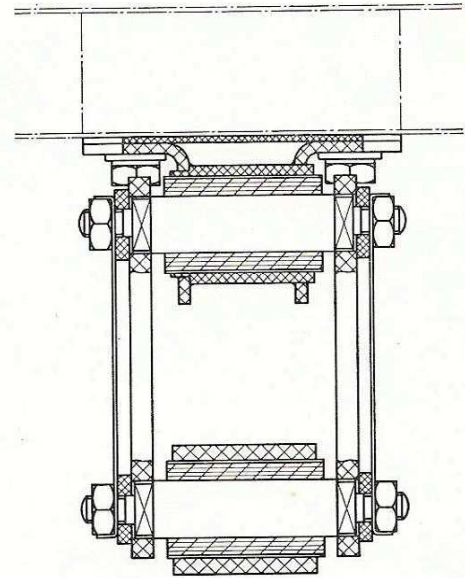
Semielliptic spring rear end mounting. - Section through shackles and bushings.
